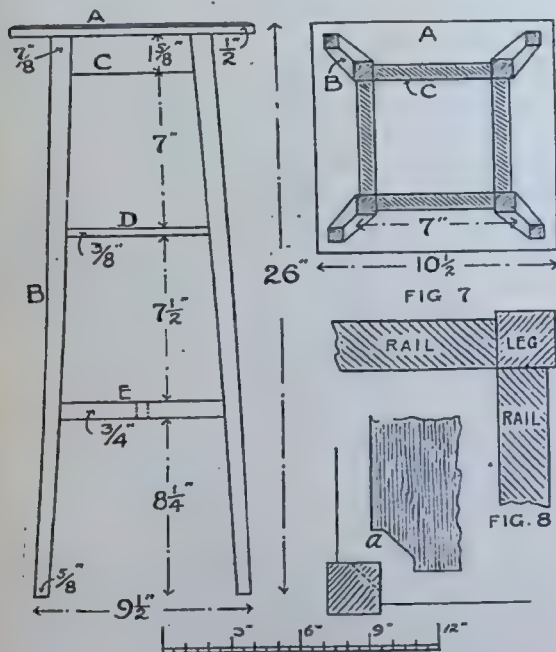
SMOKER'S TABLE—ELEVATION. FIG. 7.—PLAN. FIG. 8.—SECTIONAL DETAILS. (For description see previous page—Fig. 4.)
